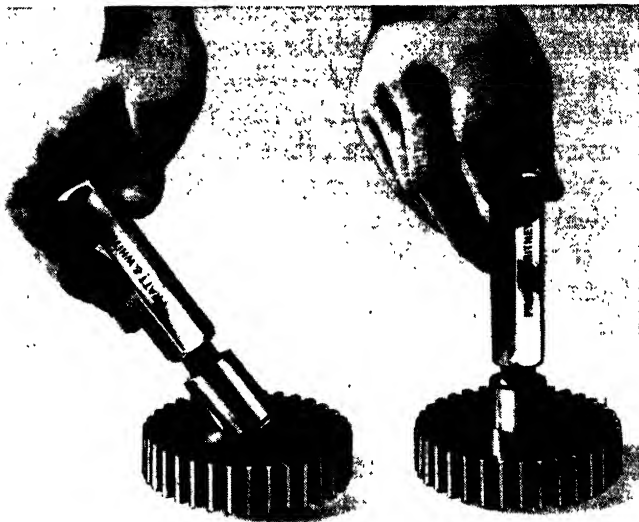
5. Pratt & Whitney "Pilot" cylindrical plug gage. (Courtesy of Pratt & Whitney Division, Niles-Bement-Pond Company.)
